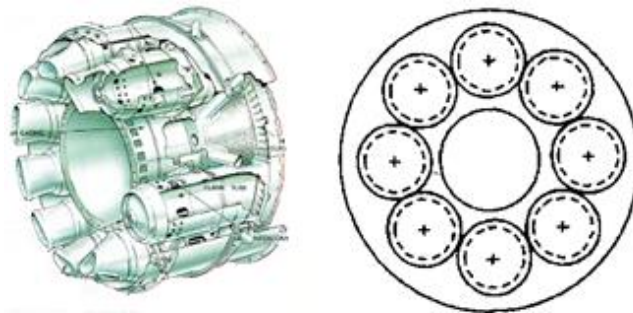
Can-Annular Combustion Chamber with Cross Sectional View [6][11]
